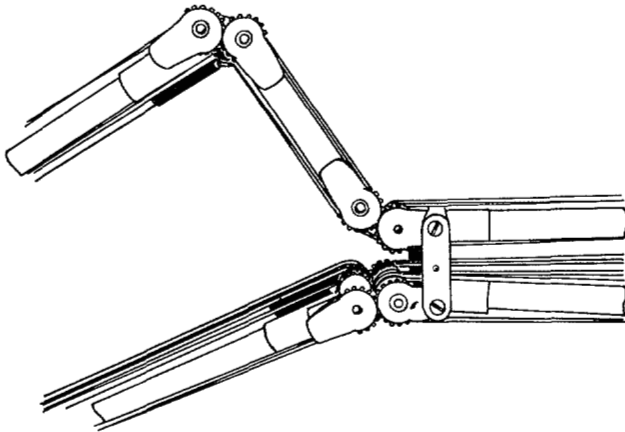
B. Side view of the central remotizer joint showing rolling action of remotizer subsection joints.
